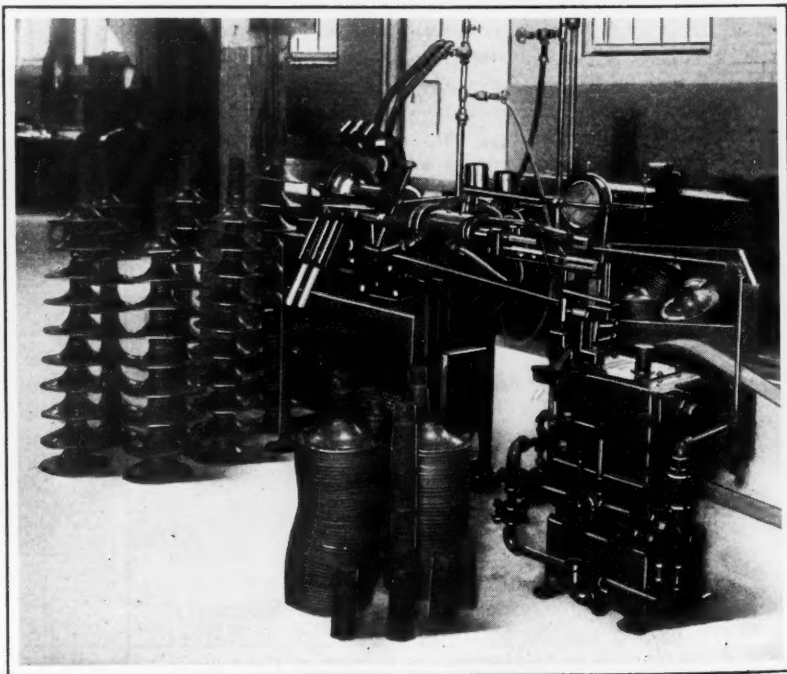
Automatic Butt Welder arranged for welding Pressed-steel Pedestals
